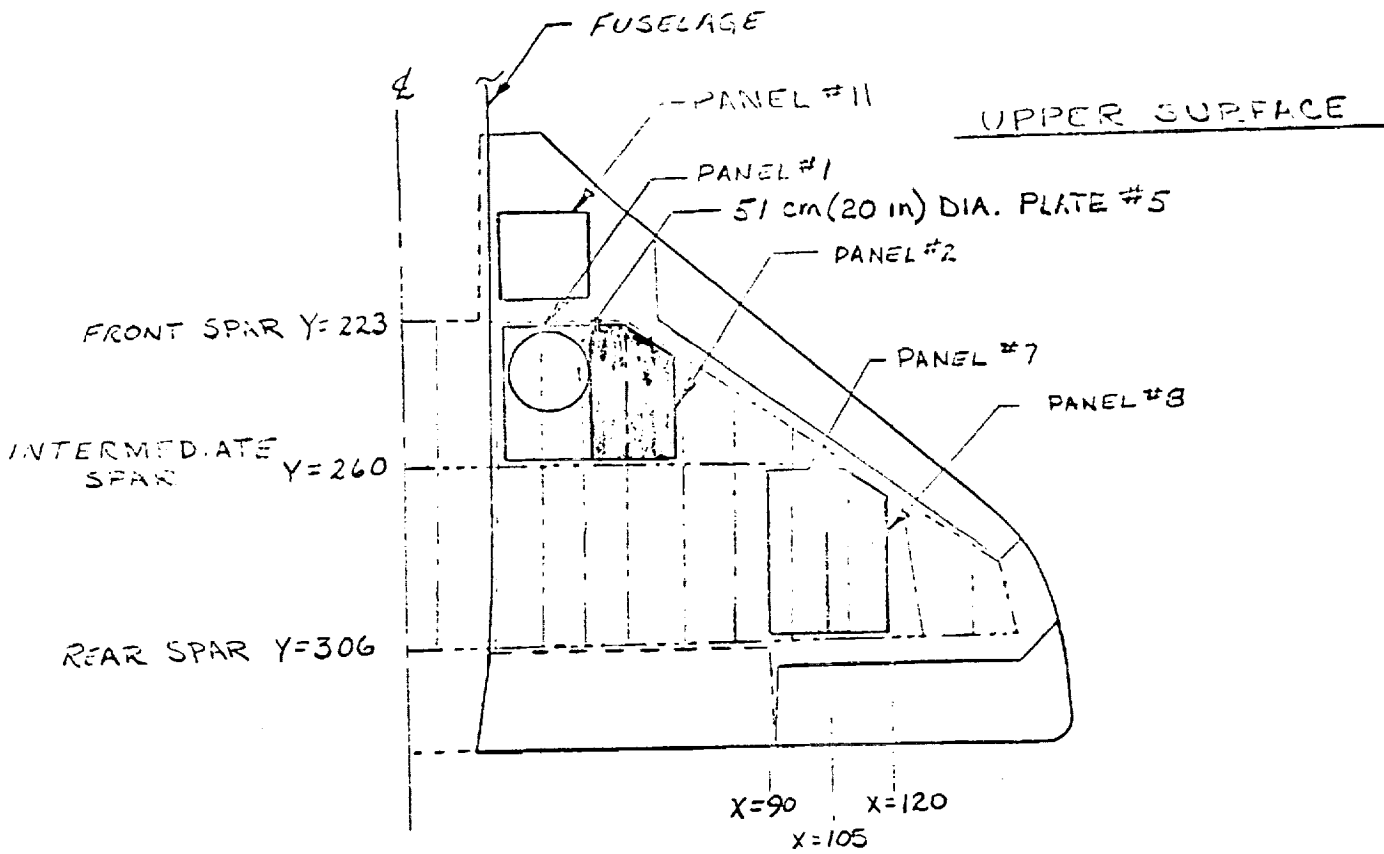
HOLE CONFIGURATION #4. PANELS 2&4 AND PLATE 6 REMOVED
